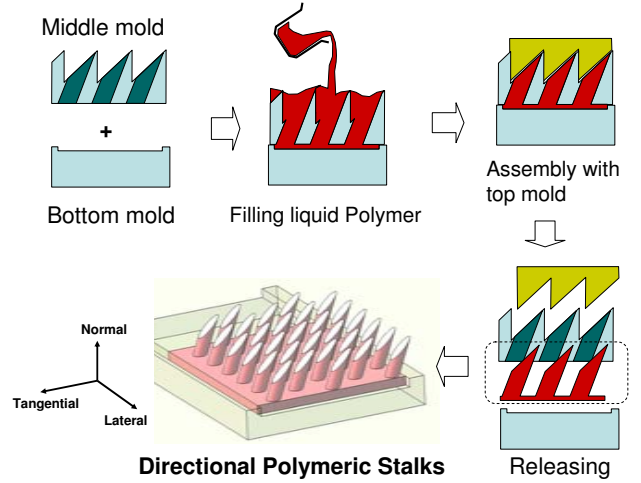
Molding process used to fabricate anisotropic patches. Mold is manufactured out of hard wax and then filled with liquid urethane polymer. A cap eliminates contact with air and creates final tip geometry.
